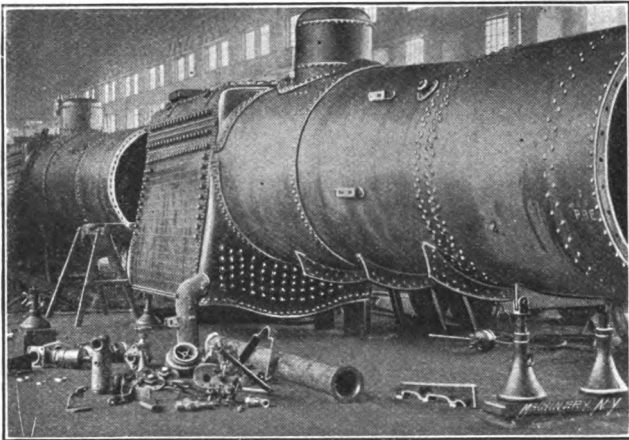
Boiler and its Fittings ready for the Boiler-mounting Gang
